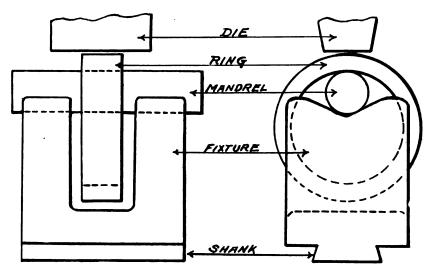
SHOWING FIXTURE FOR HEAVY RINGS
